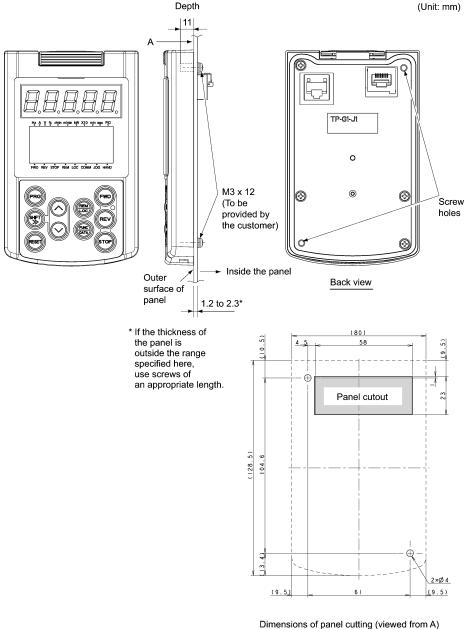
Location of Screw Holes and Dimension of Panel Cutout
